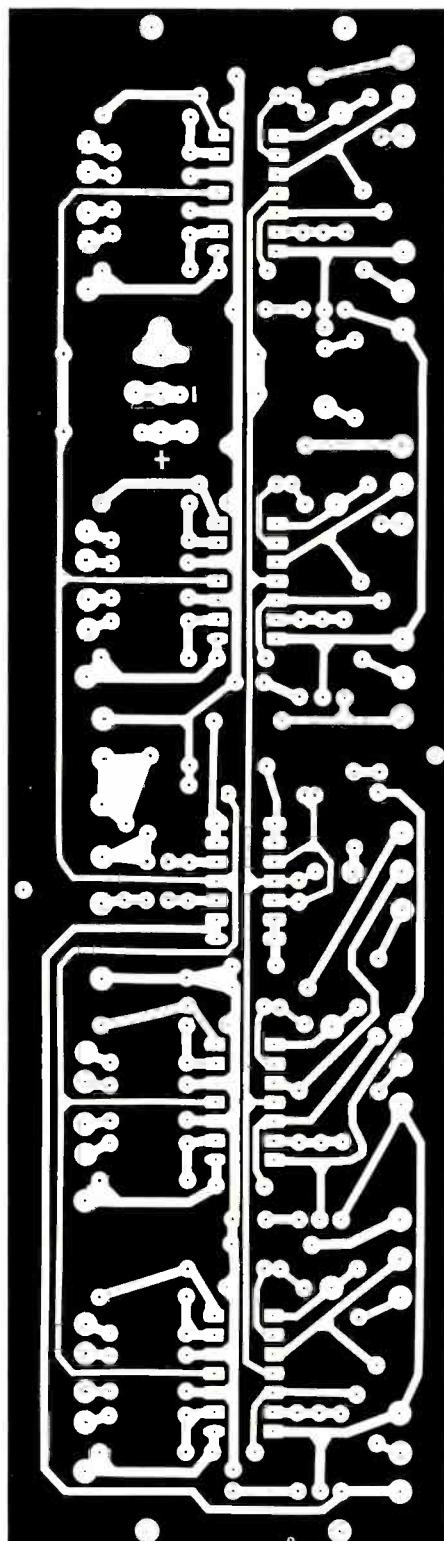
Actual-size etching and drilling guide for the main printed circuit board.
